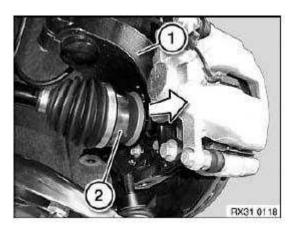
Identifying Swivel Bearing And Output Shaft Courtesy of BMW OF NORTH AMERICA, INC.
